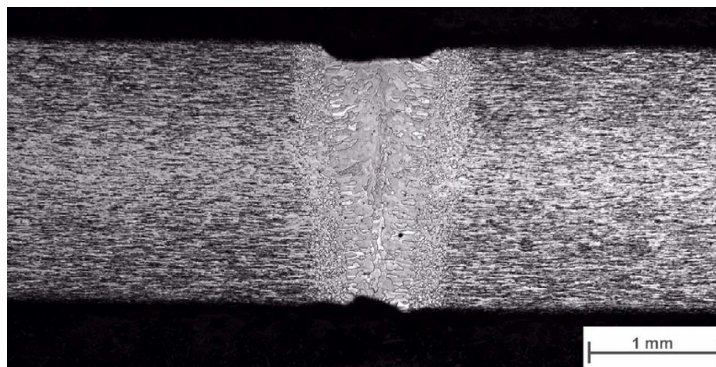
Weld cross-section of electron beam welded (EBW) 2 mm TZM sheets without filler material, with PWHT [61]
